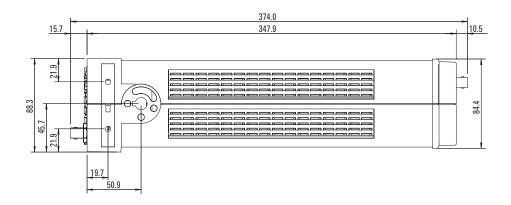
Dimensions (side view, without handle and bumper, in millimeters, nominal)
